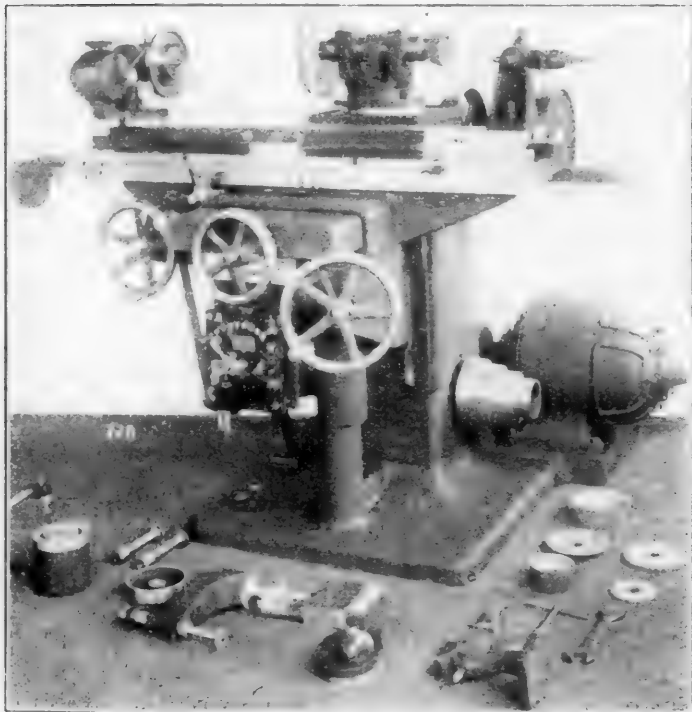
NO. 2 CINCINNATI UNIVERSAL CUTTER AND TOOL GRINDER.
